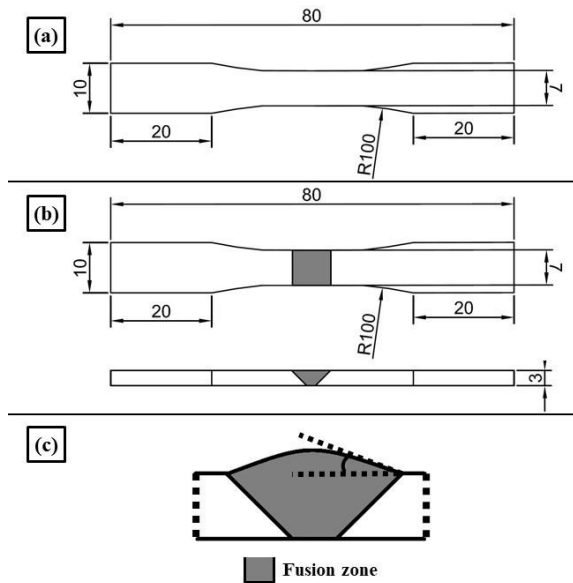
Dimensions of 6061 alloy tensile fatigue specimens (a) BM, (b) welded specimen, and (c) demonstration of weld reinforcement angle (mm).
